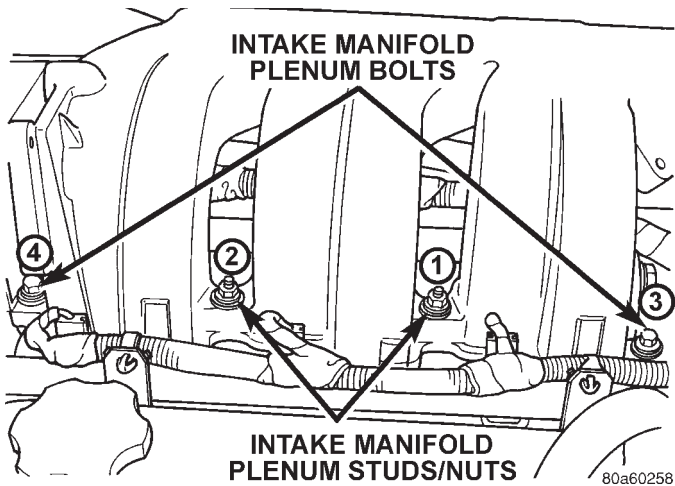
Intake Manifold Plenum Bolts and Nuts
